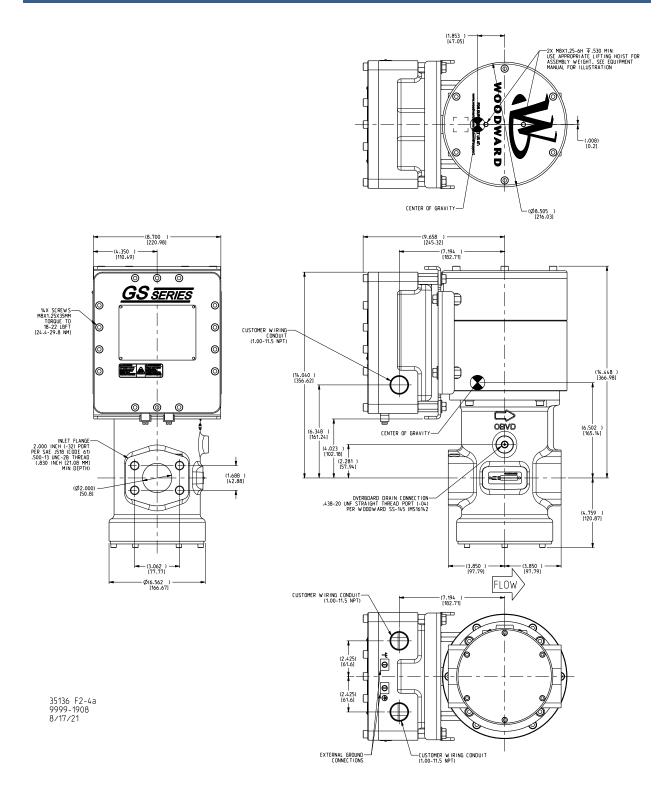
Outline Drawing Aluminum GS50 with Conduit Entries
